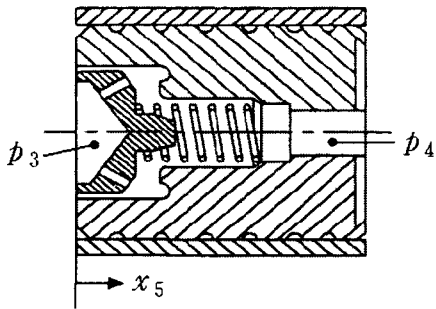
Control valve at cylinder bottom in unlock-up condition
